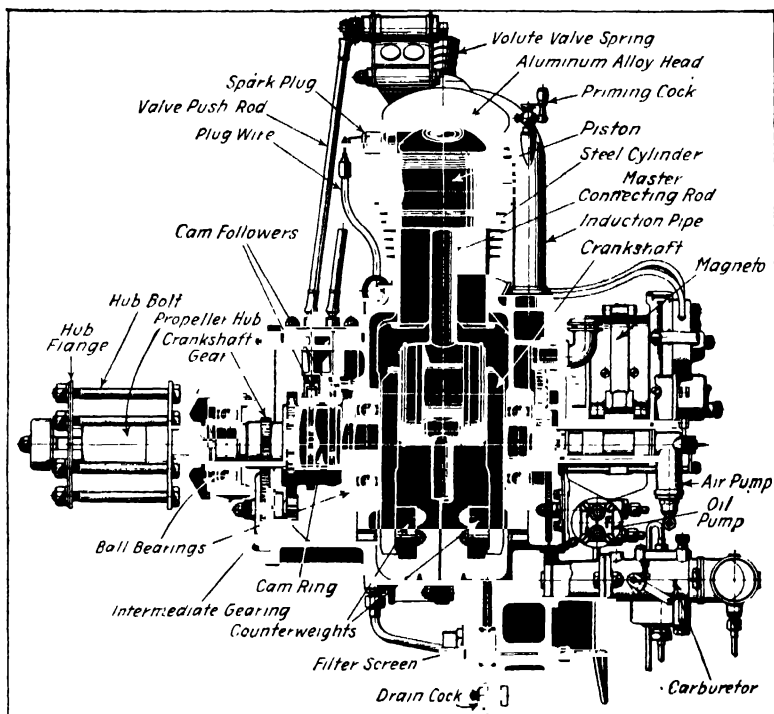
Sectional View of the Siemens-Halske Airplane Engine Showing Liberal Use of Ball Bearings Throughout.
